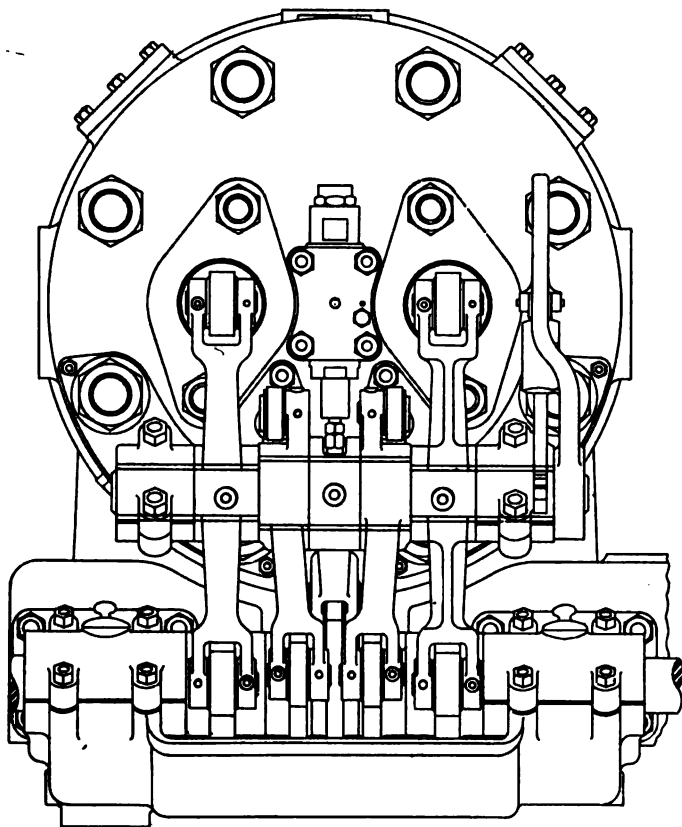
A.—National Transit 1918 design Diesel valve rocker assembly.
